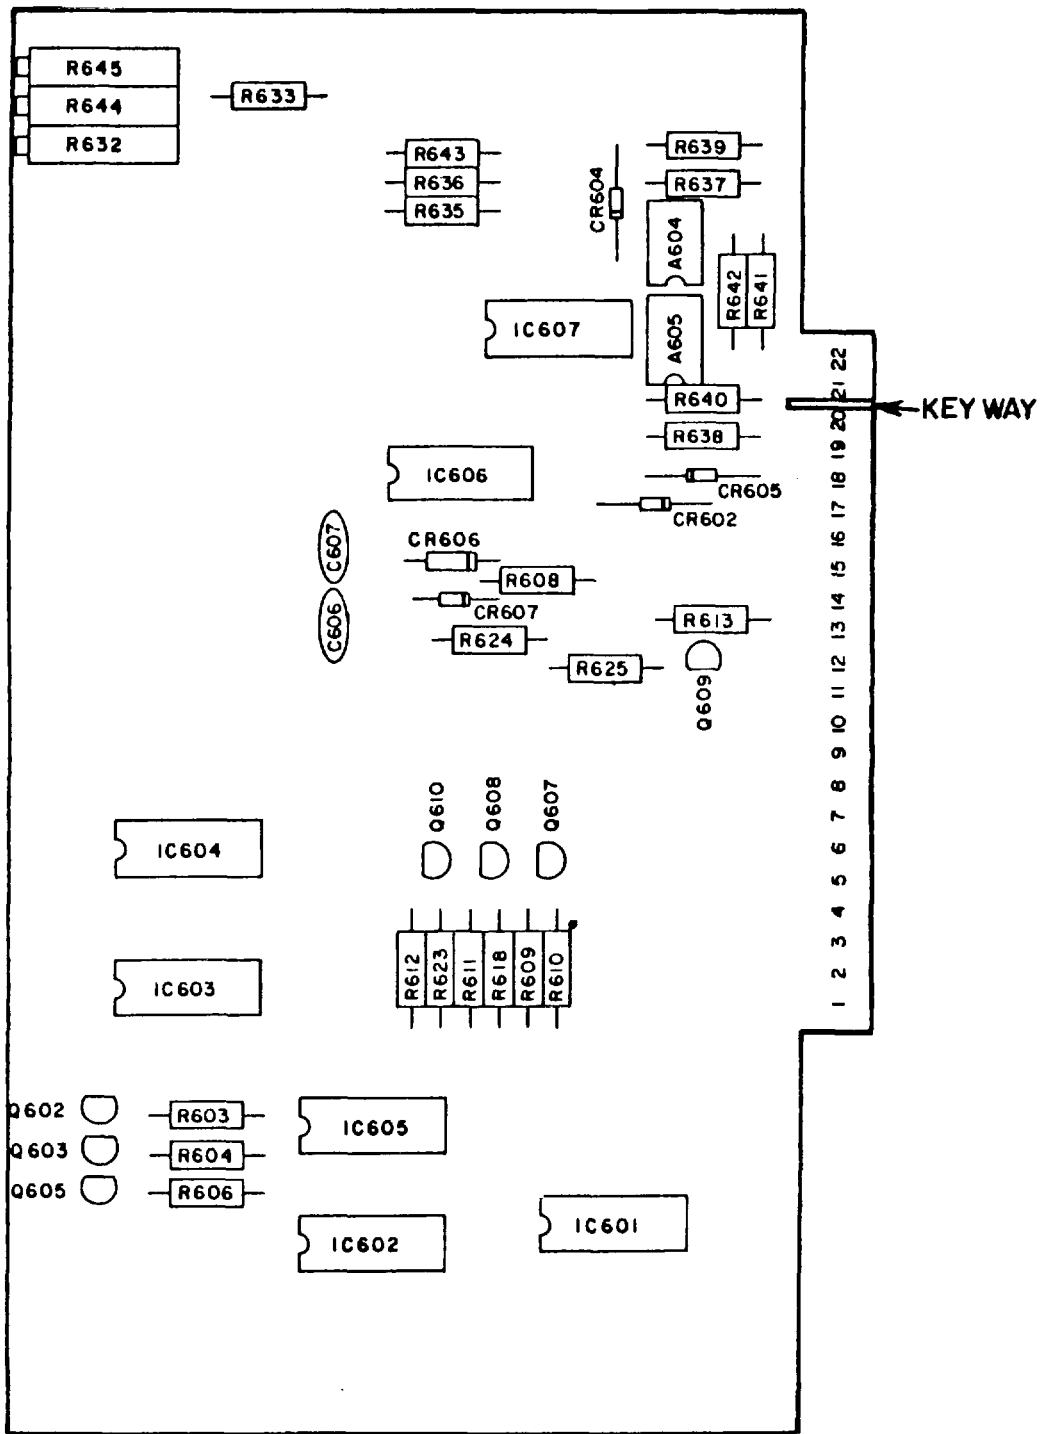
RF MILLIVOLTMETER, TOP COVER REMOVED, (SHEET 1 OF 7)
